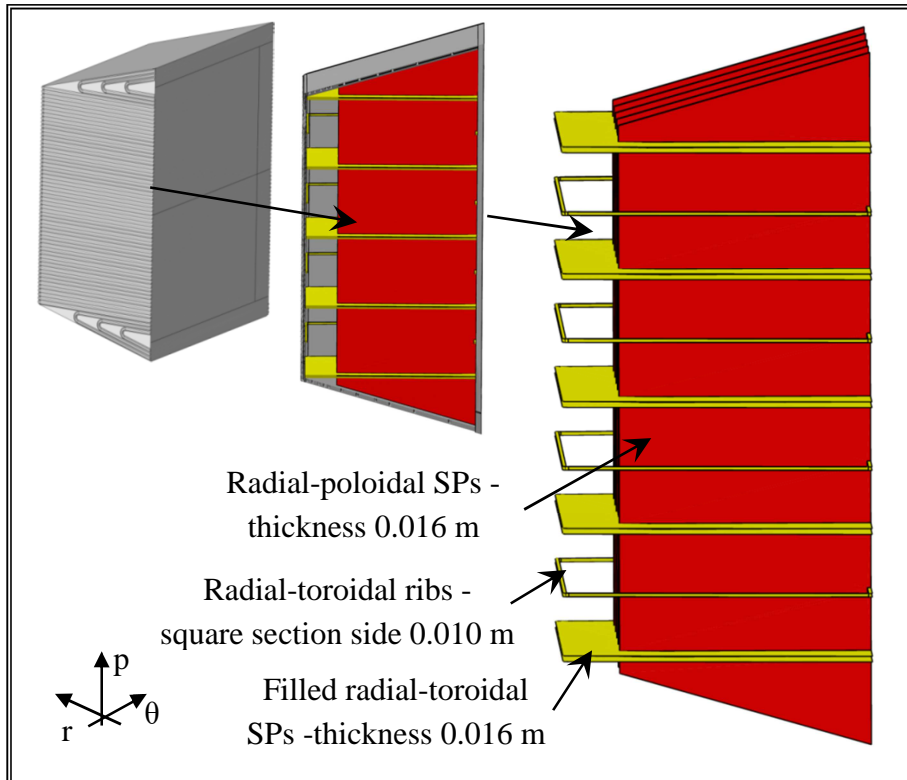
Configuration 3 - Case 1 – 3D geometric model exploded view.
